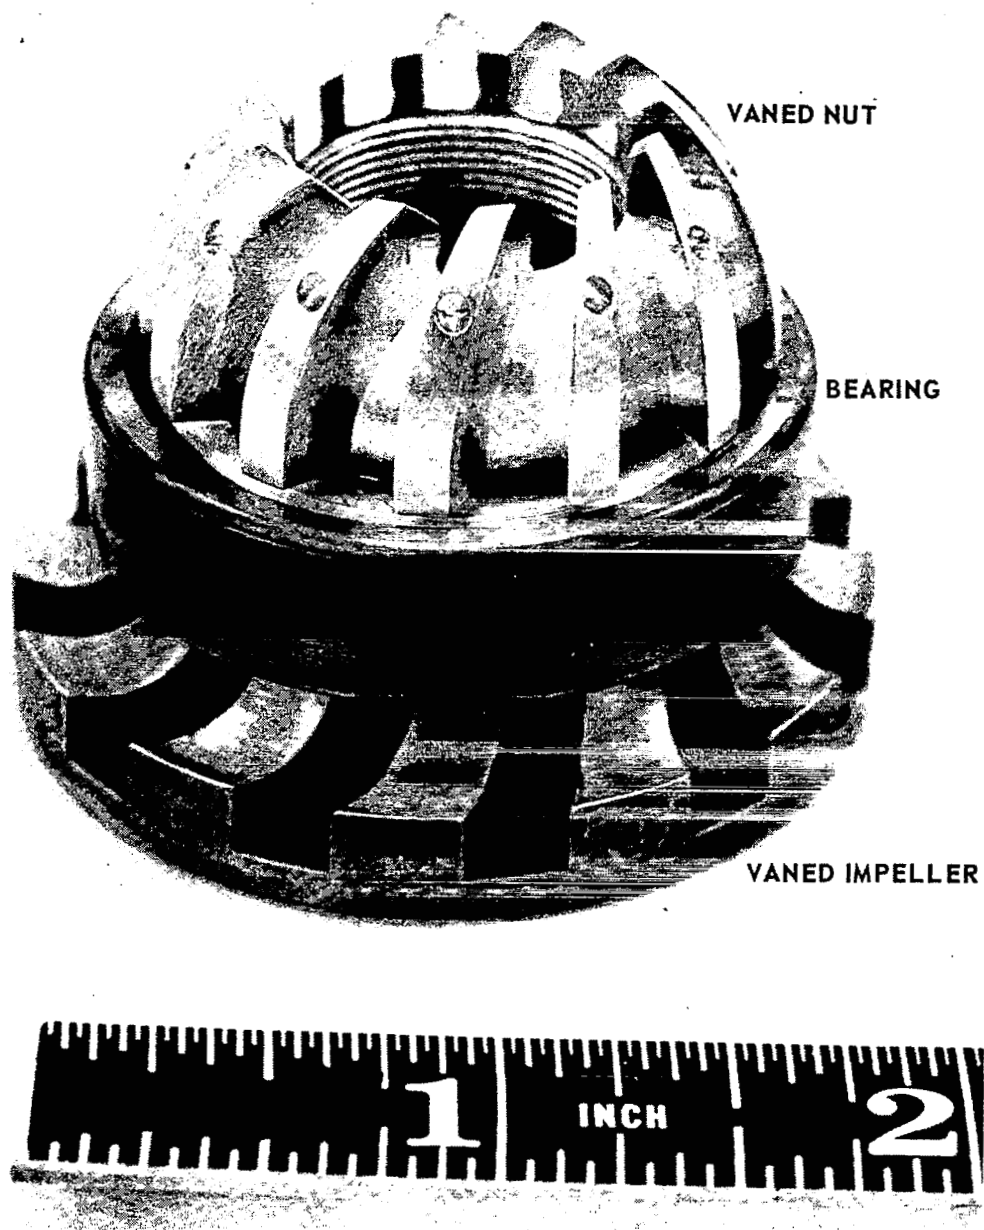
Vaned Impeller, Bearing, and Vaned Nut of Turbine-Compressor
